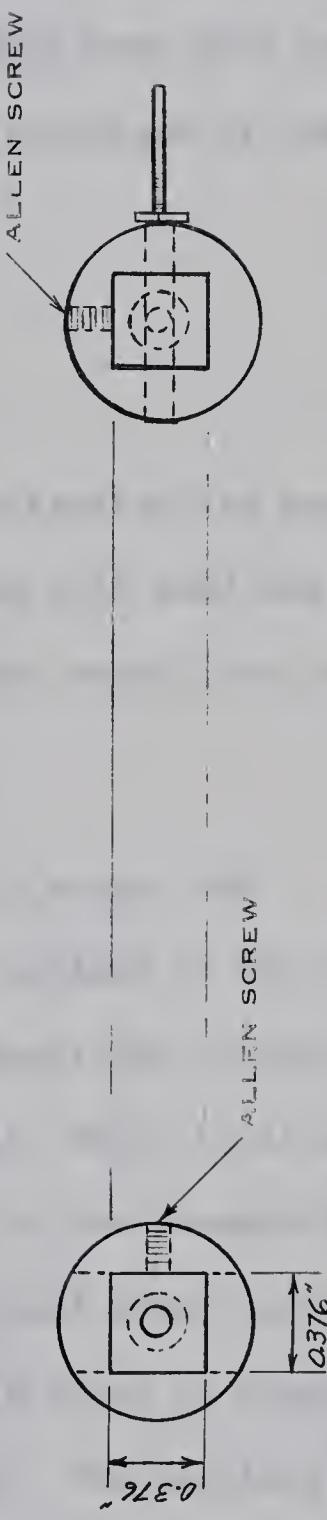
STRAIN GAUGE CORE AND COIL ASSEMBLIES
